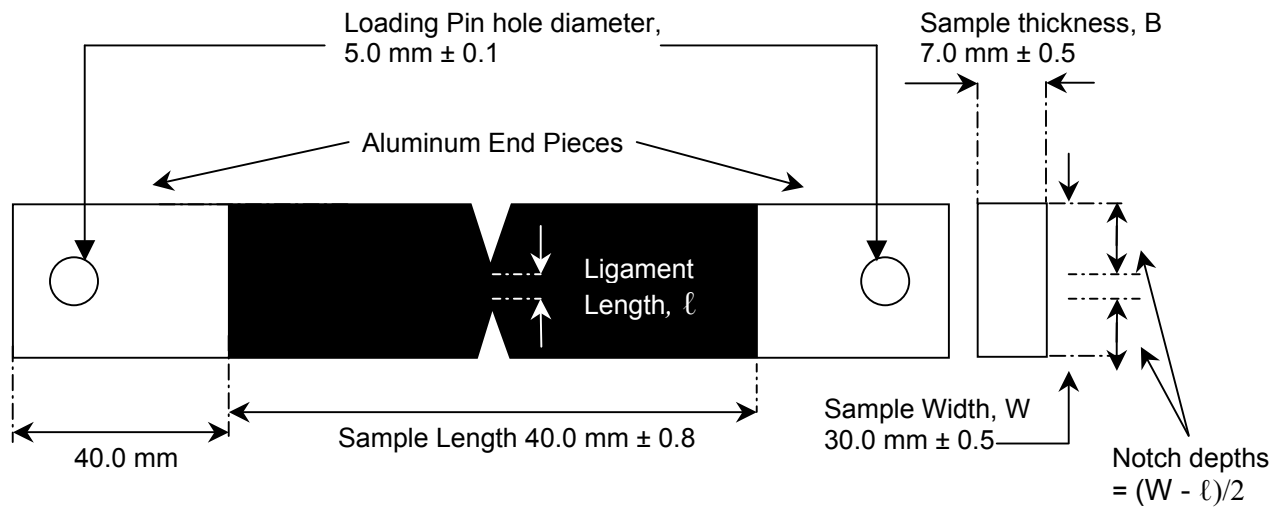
D.E.N.T. Specimen Geometry, Dimensions and Tolerances
